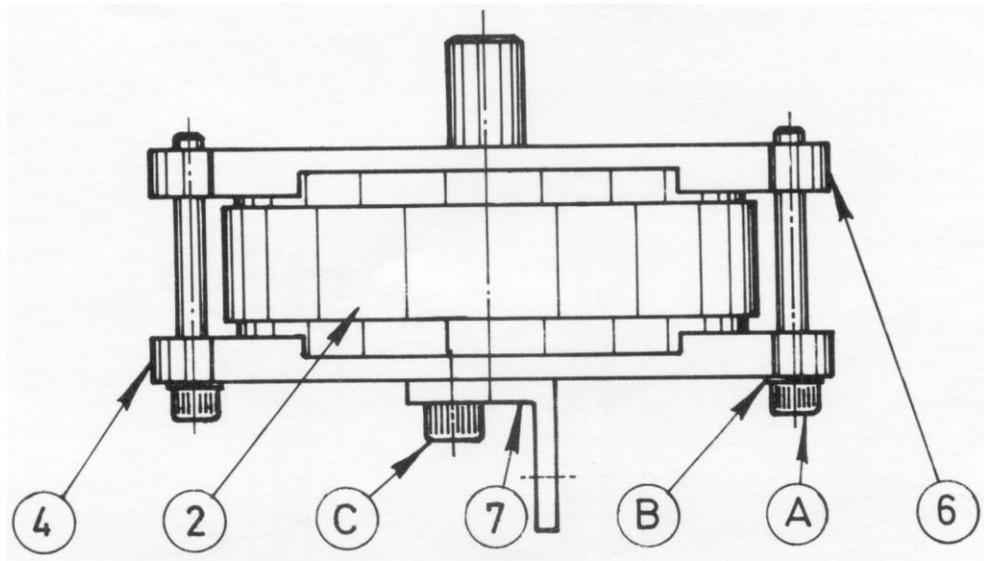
FORCE ACTUATOR ASSEMBLY (#4123-0413-0)
